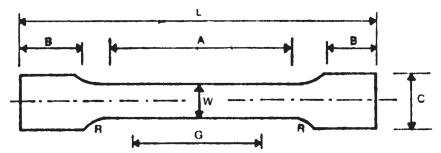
Solid Metal-Coupon Control Specimen (for dimensions, see Test Methods E 8)
